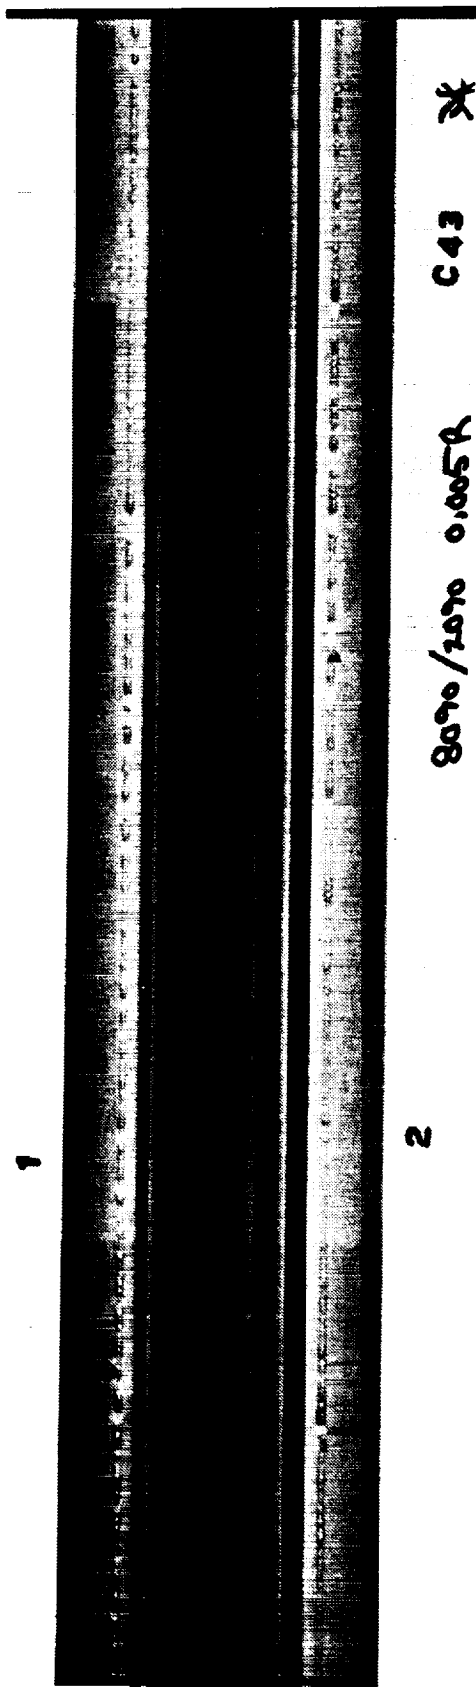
Contact Prints of Radiographs Showing Porosity in 8090-T6 to 2090-T83 Welds on Prototype Parts that were Chemically Milled 0.005 in. (0.13 mm) Prior to Welding.
